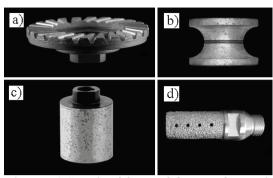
a) Sample of diamond disc grinding tool, b) Sample of diamond profile grinding tool, c, d) samples of diamond finger grinding tools
